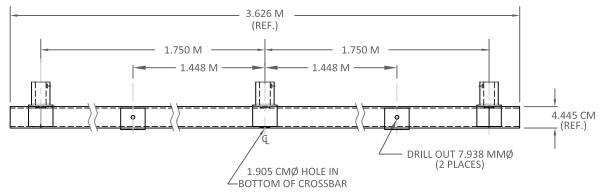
CALVERT (3) LIGHT AT 1.750M SPACING
